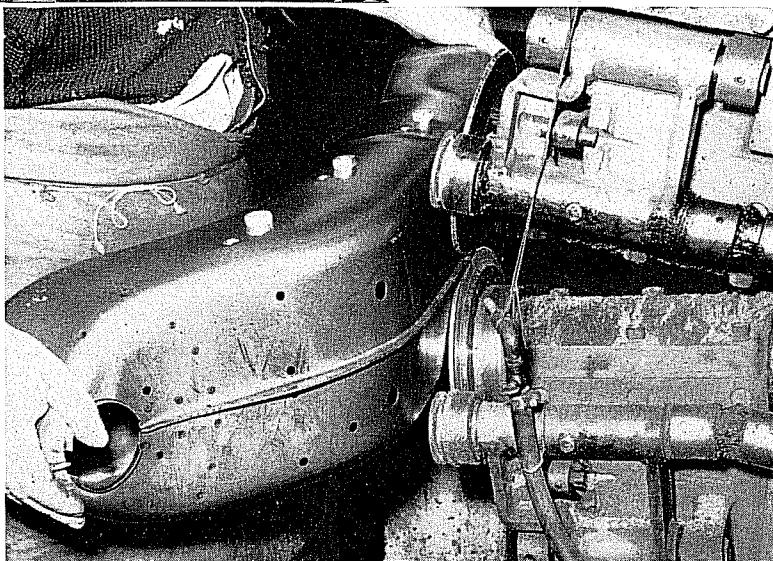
(below).—Roller seam welding of main frame pressings
